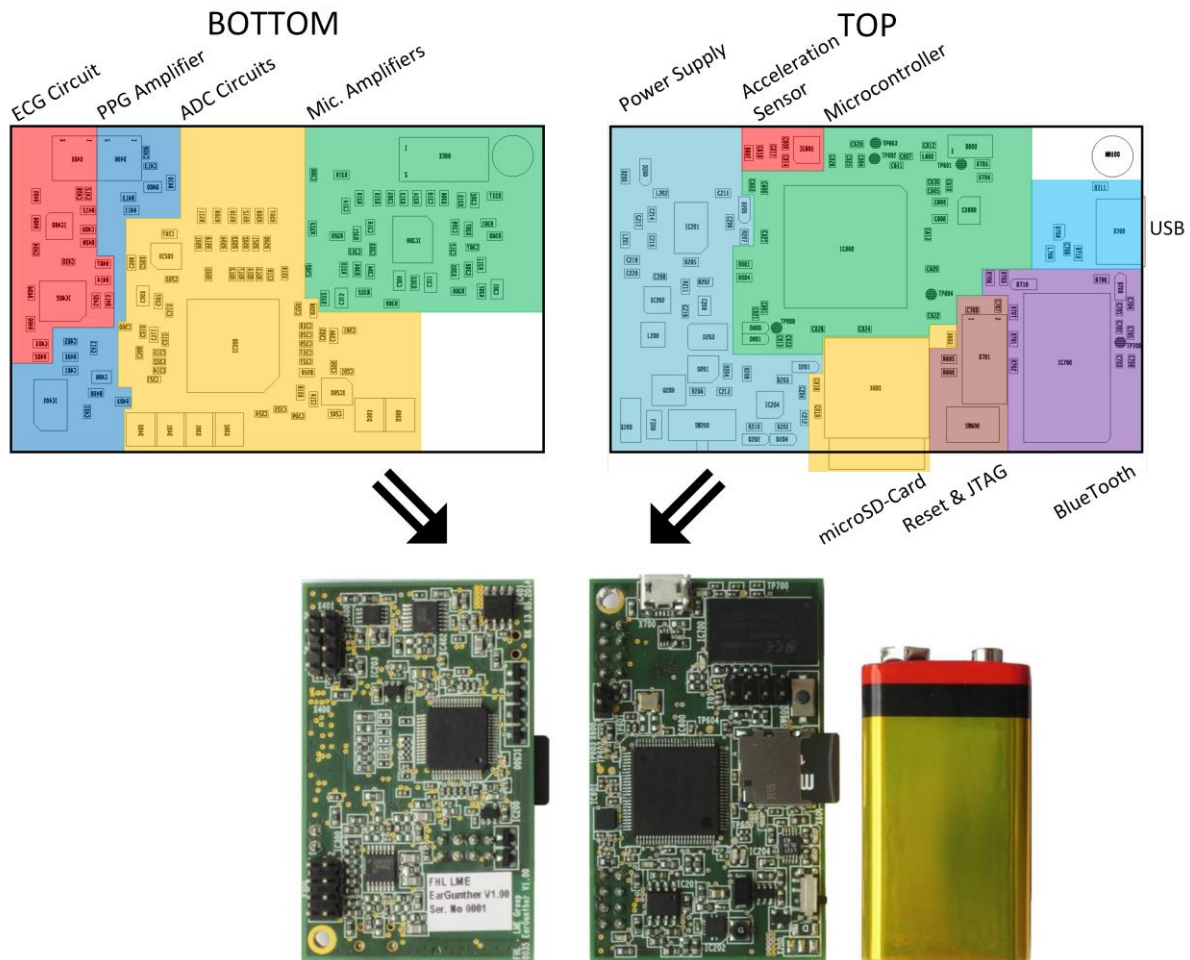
Developed prototype of the measurement device. The 6-layers PCB contains more than 200 components and is populated from both sides. The 9 V batterie is just shown to compare the dimensions ($61 \times 37 \text{ mm}^2$) of the PCB.
